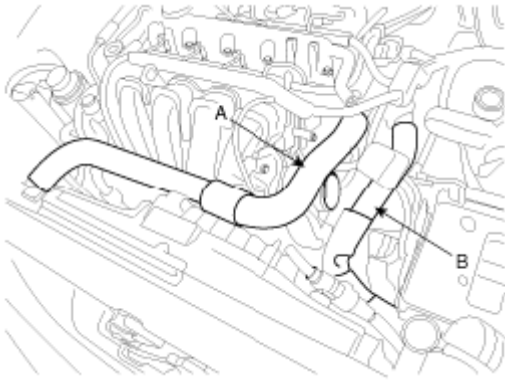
Identifying Radiator Upper Hose And Lower Hose
